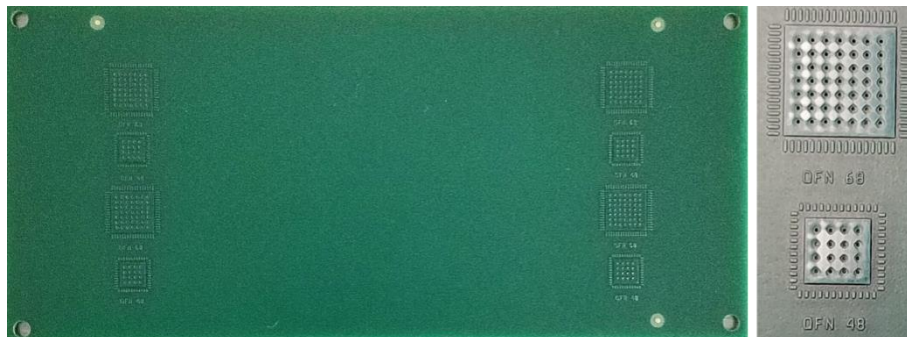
Test Circuit Board with Solder Mask Tent on the Bottom Side
